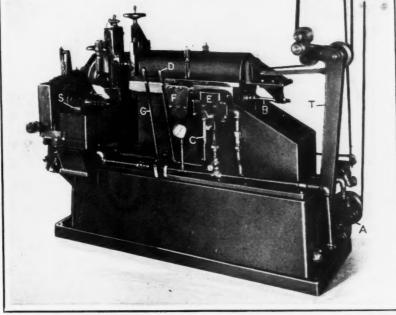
Garrison Automatic Gear Grinder, which is operated hydraulically
